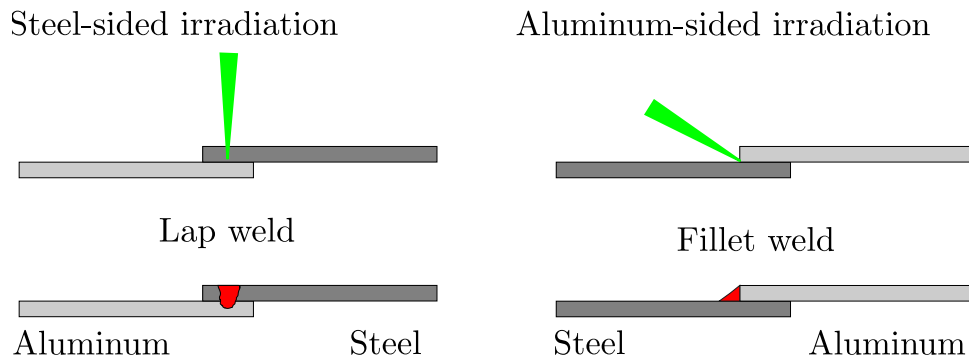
Schematic setup for the laser beam welding of different dissimilar lap welds and fillet welds for steel and aluminum with steel-sided and aluminum-sided irradiation on the left and right, respectively [101]
